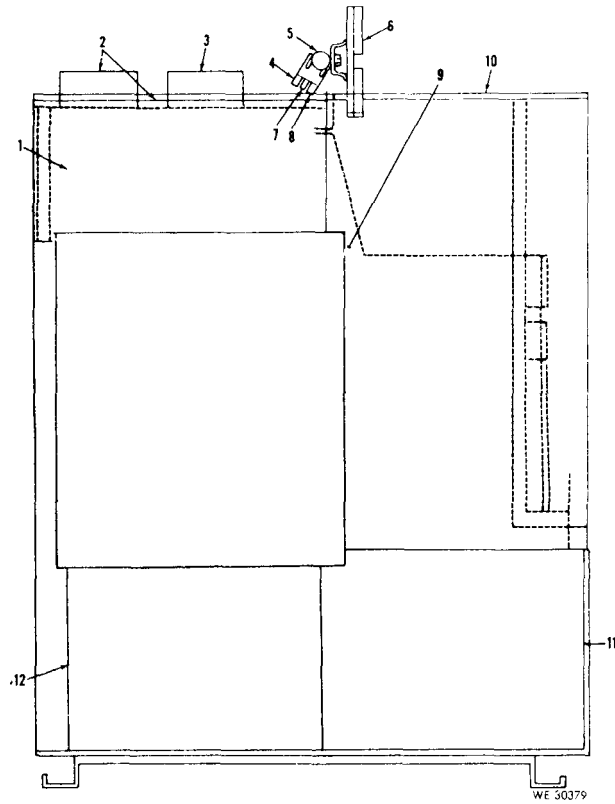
Cabinet, blower duct and regulator mounting plate assembly (test stand 7336-1).
